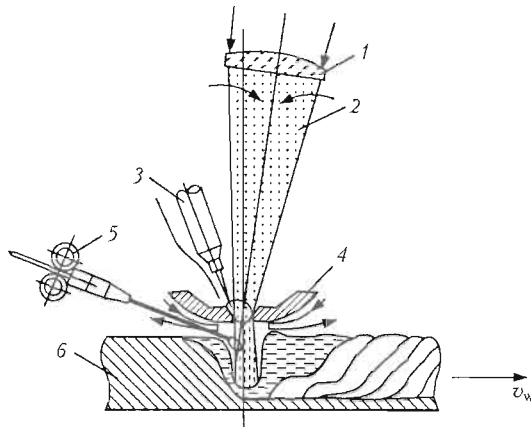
Scheme of the experiments on hybrid welding using the integrated direct action plasma torch: 1 – focusing lens; 2 – laser radiation; 3 – cathode; 4 – nozzle; 5 – filler wire; 6 – anode
